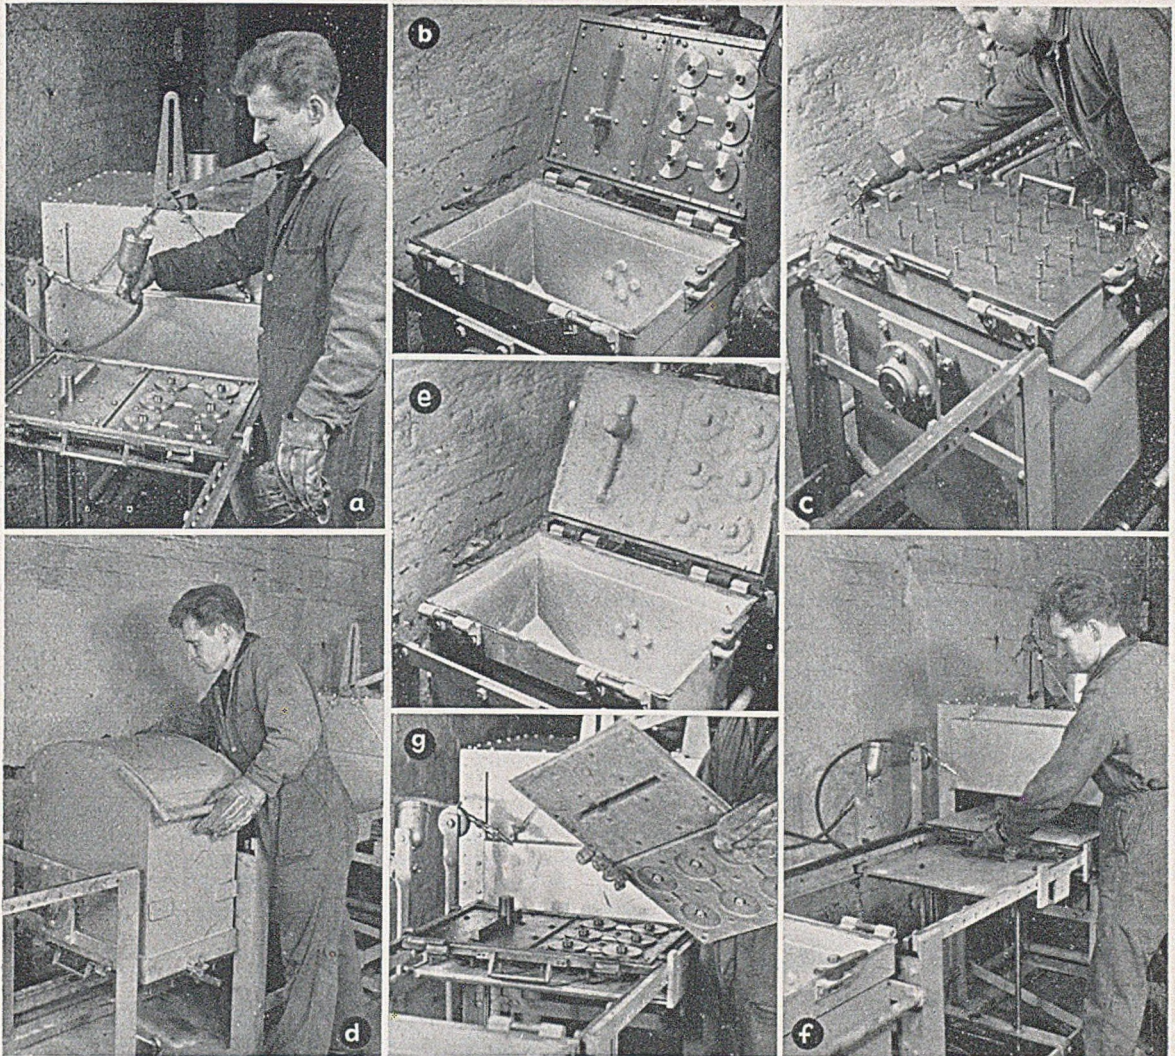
Stages in the Production of Shells on the F.L.C.B. Equipment: (a) Spraying the Patternplate with Release Agent; (b) Hinging the Plate to cover the Dump-box; (c) Patternplate on the Dump-box (also showing the Ejector Pins); (d) Dump-box swung over for Investment; (e) Dump-box turned back and Patternplate with its adhering "Green" Shell; (f) Sliding the Pattern and Shell into the Oven for Curing; and (g) Finished Shell stripped from the Plate.
